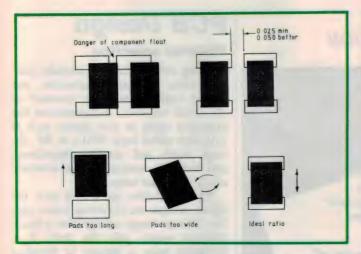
PCB pads for SMT chip components need to conform to much tighter tolerances than those for leaded components, as illustrated here.
